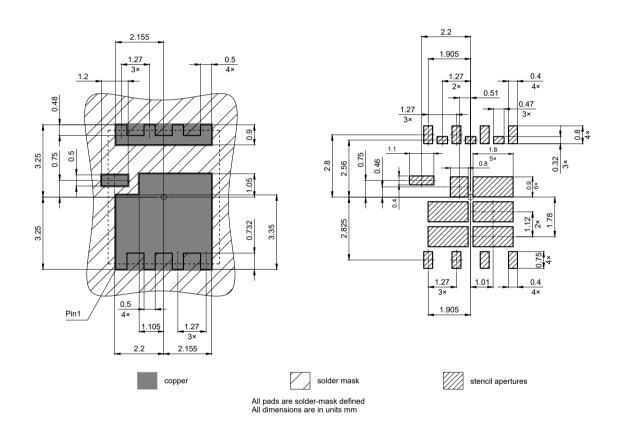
Footprint Drawing PG-WHTFN-9, dimensions in mm
